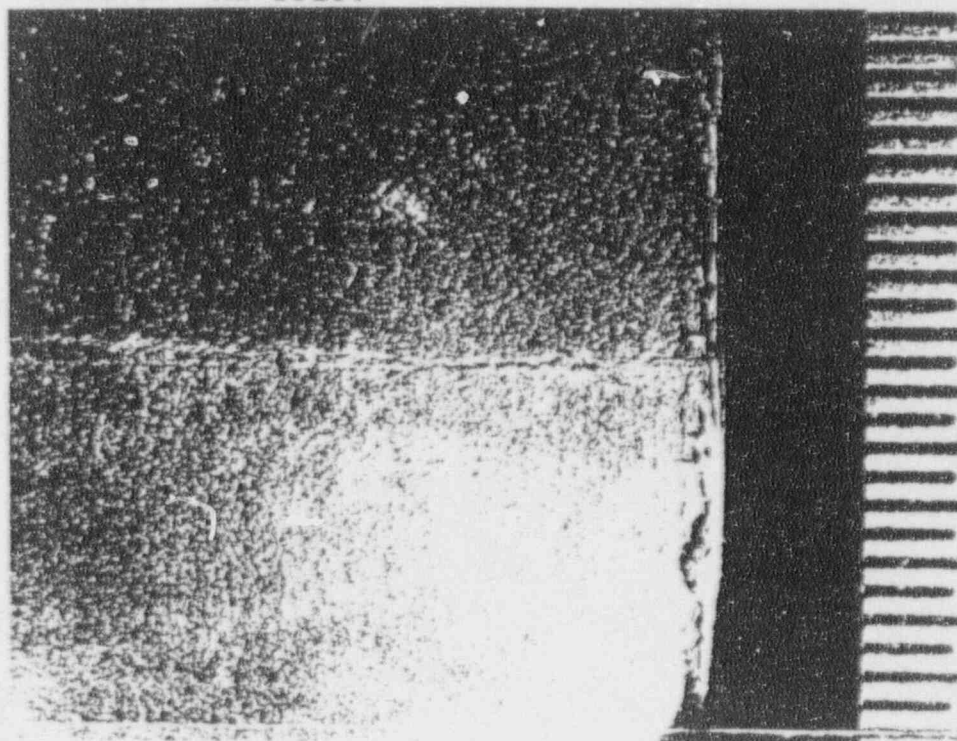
Detail of crack in shield after shield was removed. Solder is visible in crack. Scratch mark which crack followed is visible at left. Gauge - 1/64". Ma-2514.
